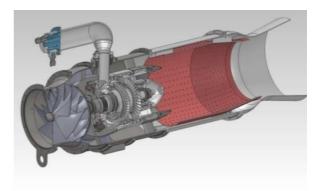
The fabricated prototype counter-rotating axial fan turbojet (CRAFT) engine for ground tests.
